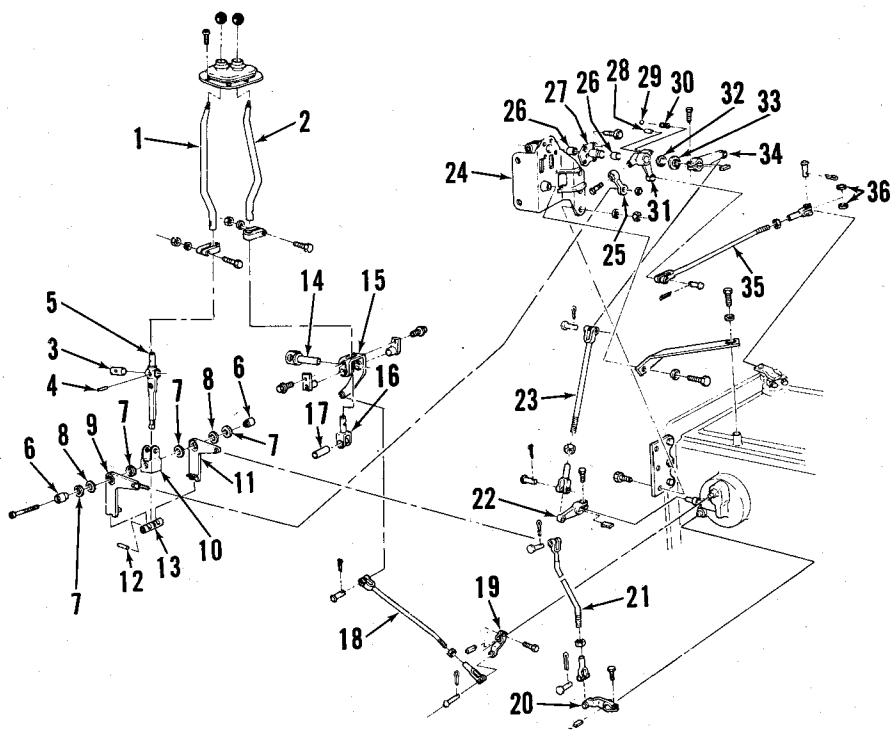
Exploded view of shift linkage on Models 8700, 9700, TW-10, TW-20 and TW-30.
